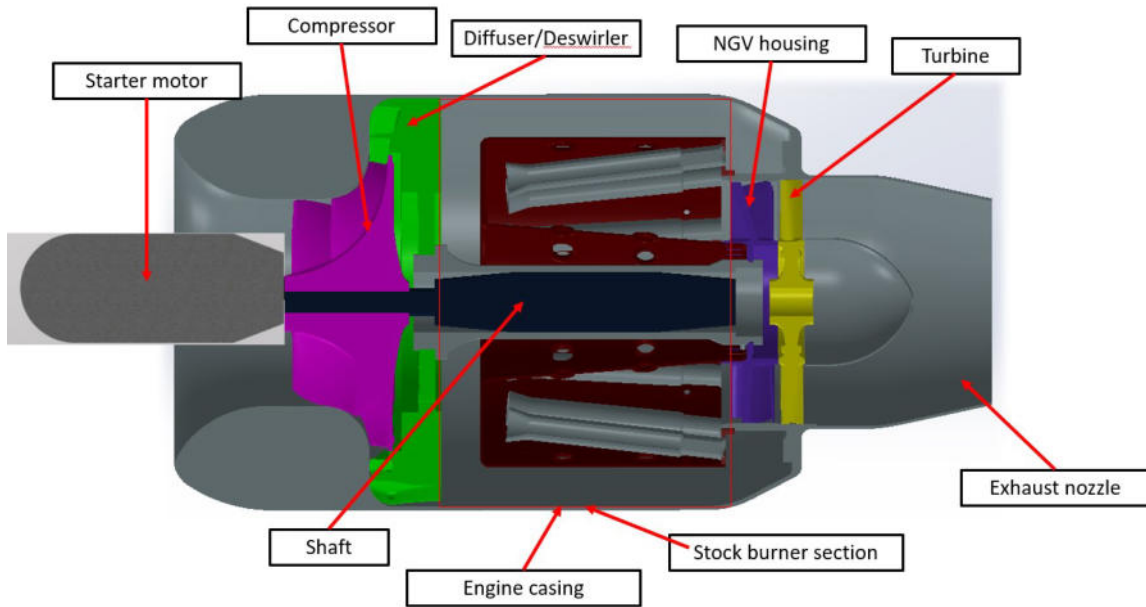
CAD model of JetCat P400 engine equipped with the cavity-stabilized compact combustor
